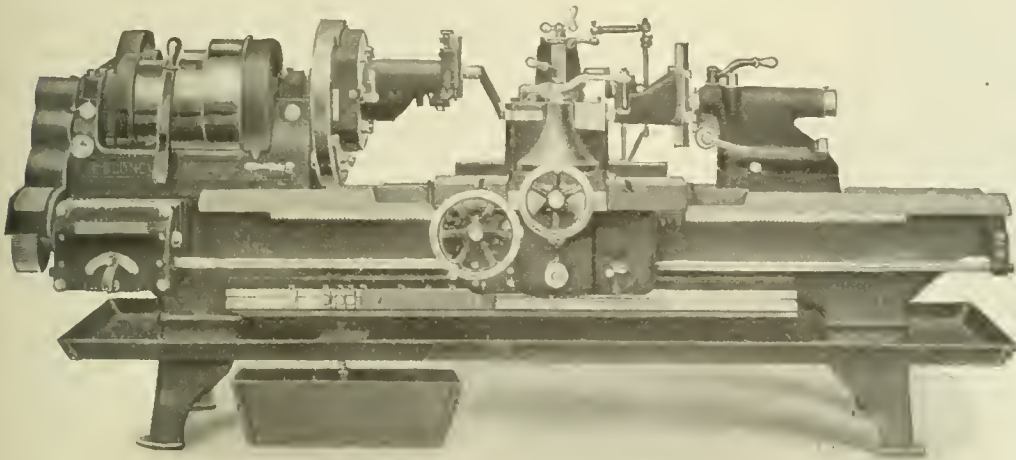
Le Blond Heavy-duty Crankshaft Lathe
